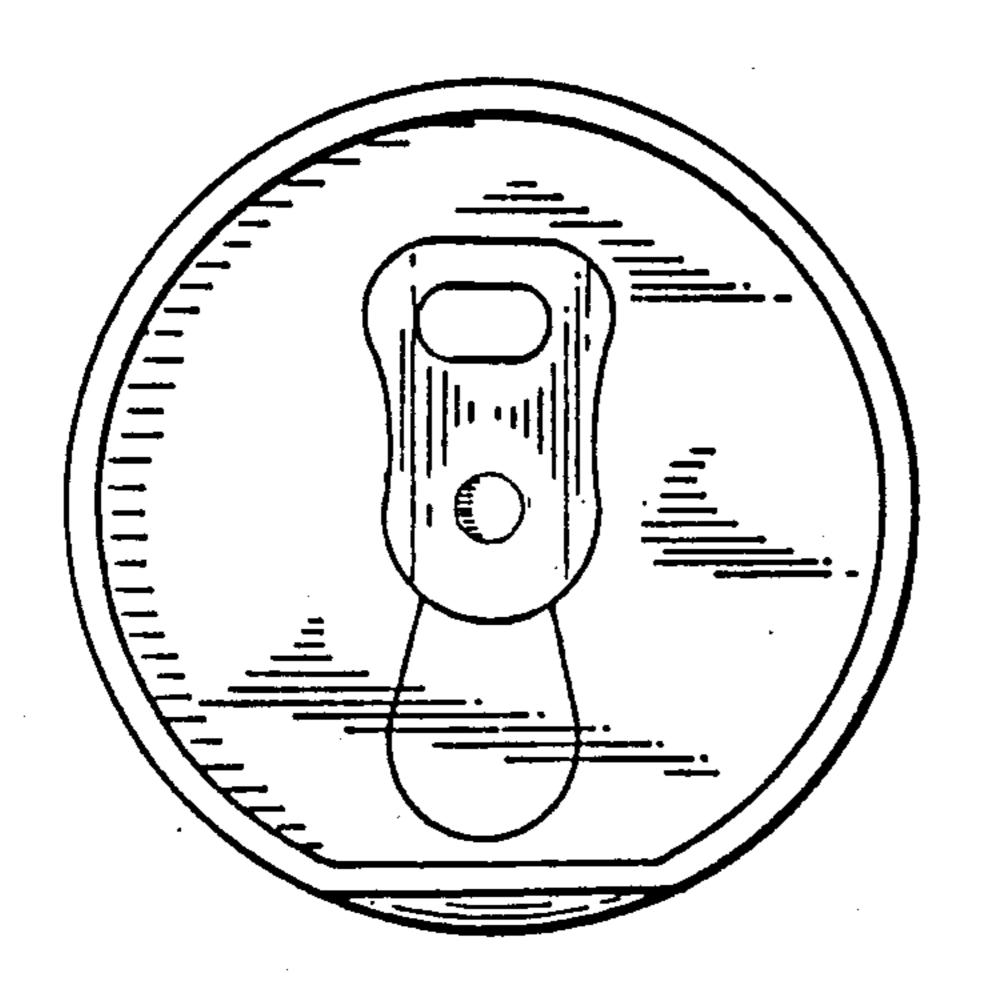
is a bottom plan view of the design shown in FIGS. 4 through 6;
